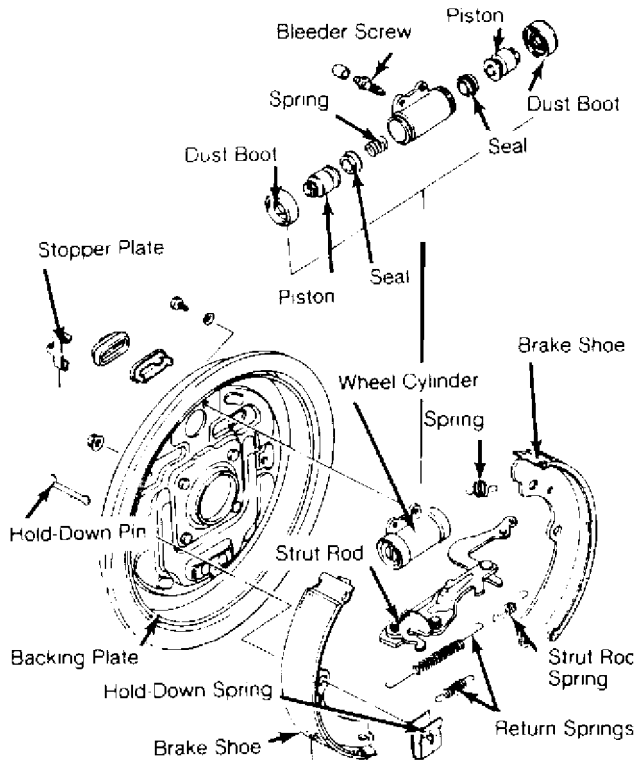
Identifying Rear Brake Assembly Components (Typical)
